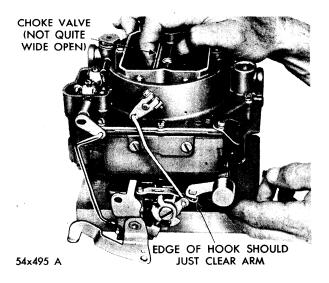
Velocity Valve Lockout Adjustment-Minimum
